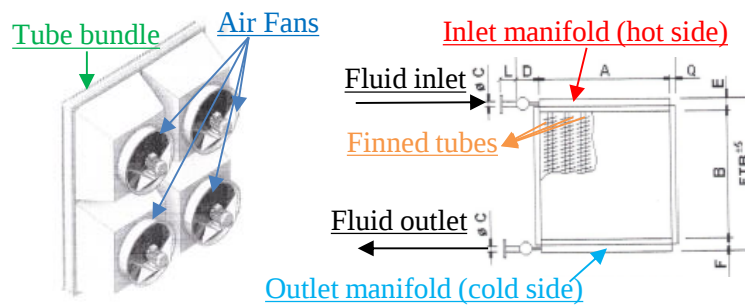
De-superheating and condensation air cooler module: 3D view (left) and cutaway view of the cooling bundle (right)
